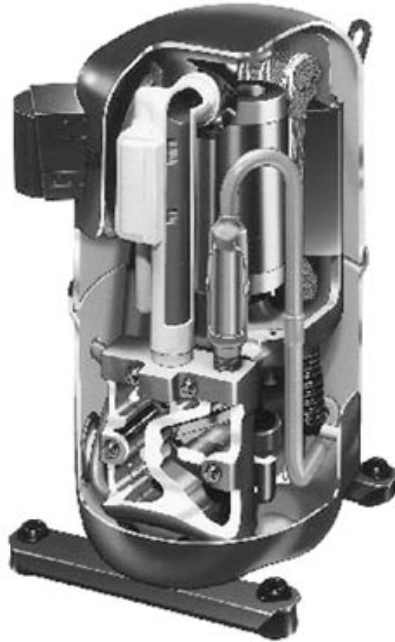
Cutaway of a hermetic scroll compressor (courtesy of Copeland Corporation, Sydney, OH).
